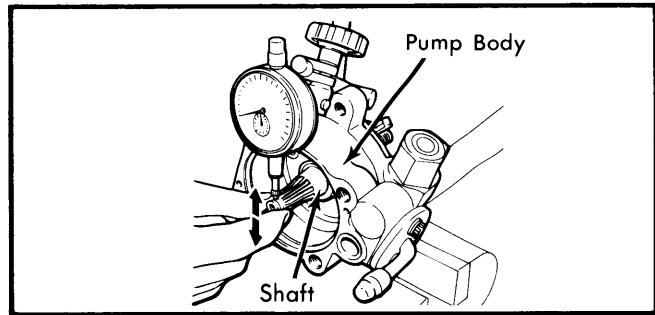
Measuring Clearance Between Shaft and Pump Body
